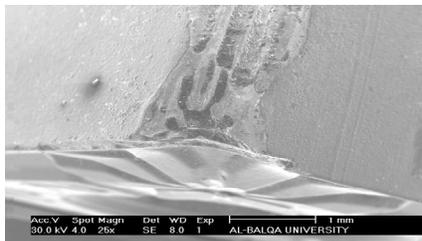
SEM images of coated tool inserts No.1 after machining at 29 m/min
